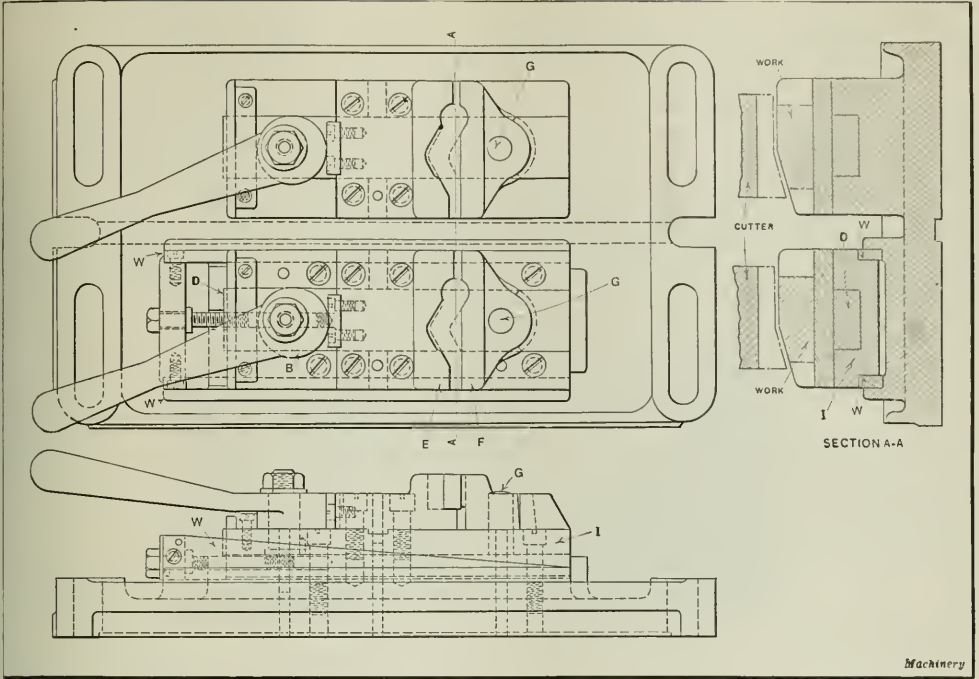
Duplex Milling Fixture with Provision for adjusting the Vertical Position of One Holding Unit
